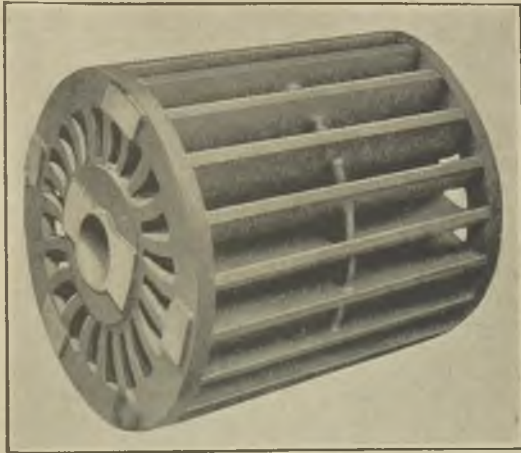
CAST MONEL-METAL PADDLE WHEEL,
